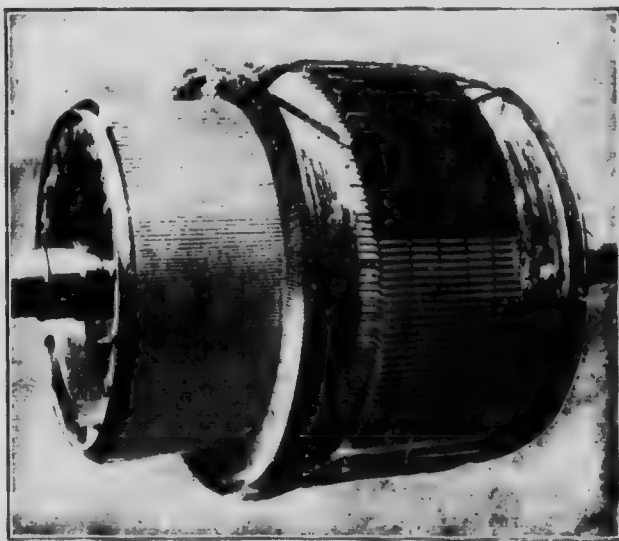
Lap Winding with Cylindric Winding Drum and End Connectors.
